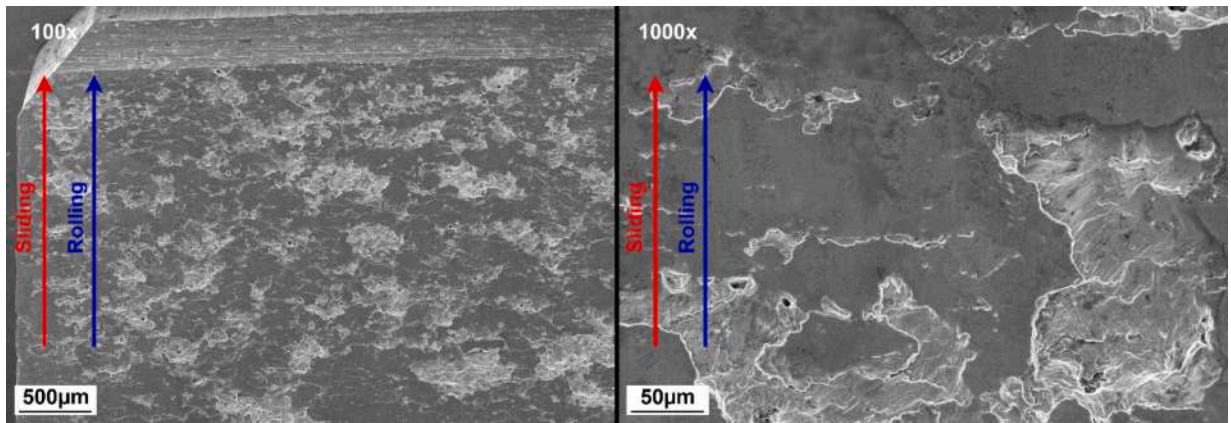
Typical appearance of damaged tooth in pinion B1-200-L, showing pitting in the addendum.
